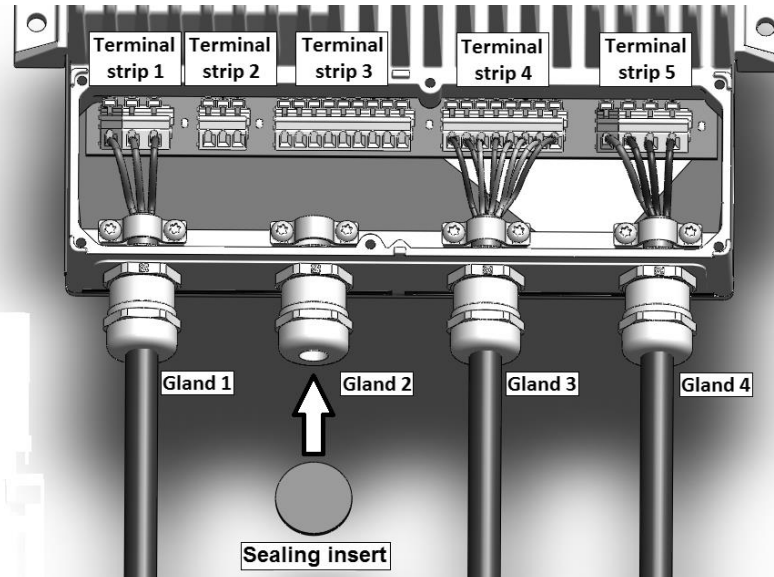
Example how to install cables, wires and install the sealing insert for sealing cable gland.
